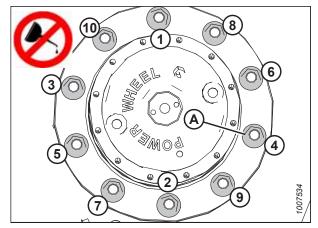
Drive Wheel – Nut Tightening Sequence
